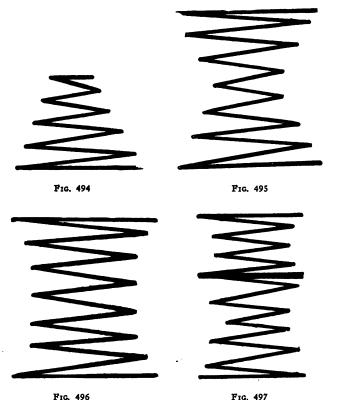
FIG. 497 In Figs. 494 to 496 are illustrated the shapes of the cushion springs referred to on page 225. In Fig. 497, is shown a section through a typical "double-deck" spring construction.
